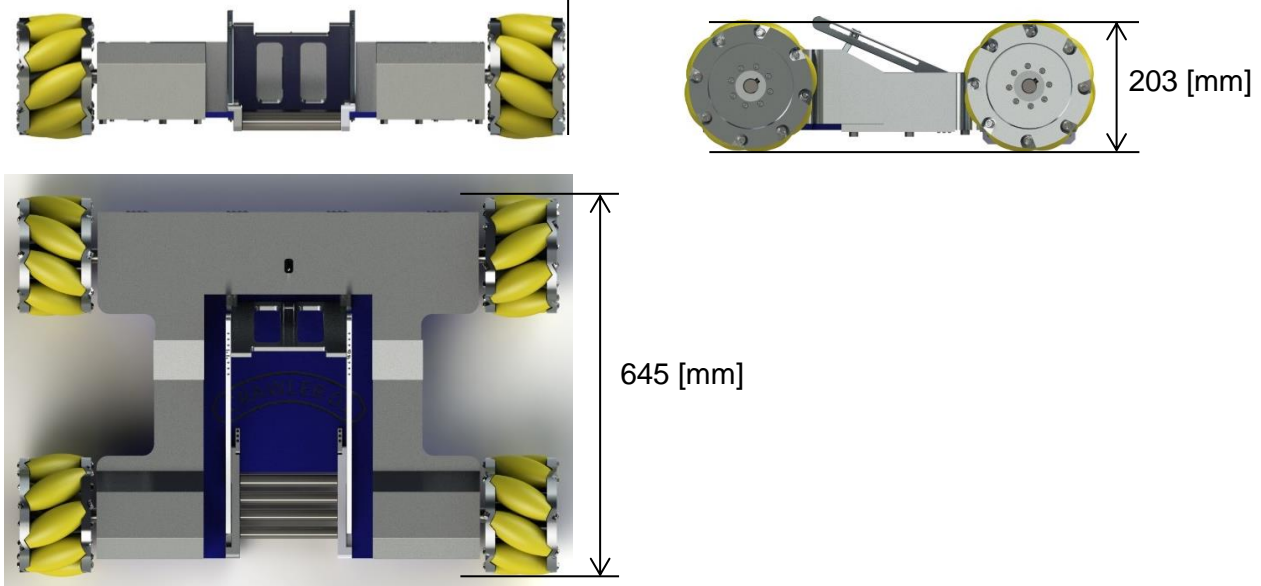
Views of the "CRAWLER 01" tug with dimensions.
